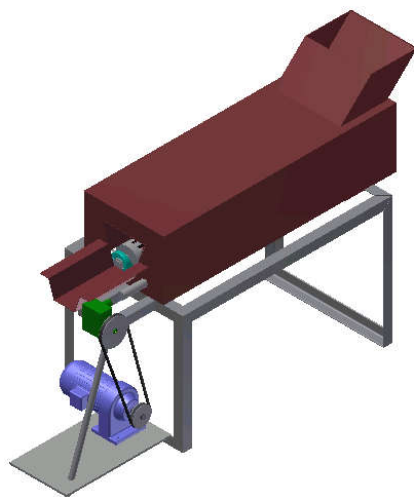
A model of the cassava peeling machine Fig. 32: The cassava Peeling and washing machine
